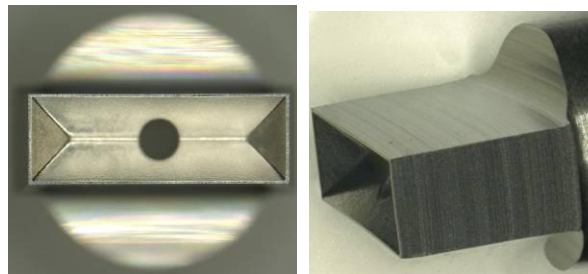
Example of tungsten carbide die collet tool recommended for GaN power bar picking (indicative dimensions)
